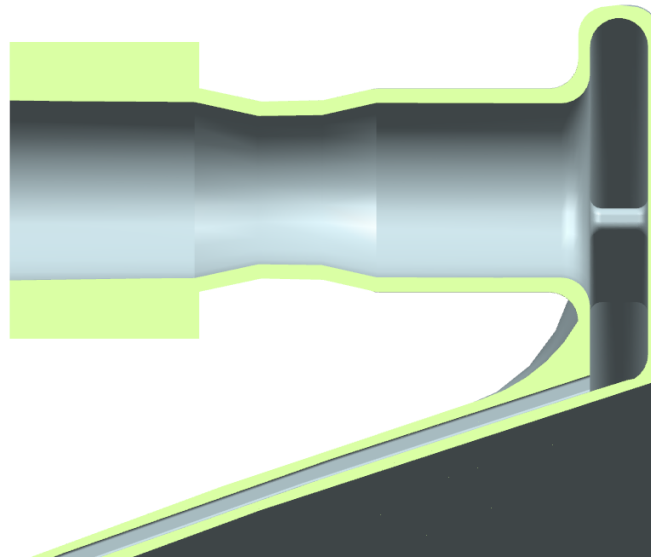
Detailed view of the nozzle oxidizer inlet
